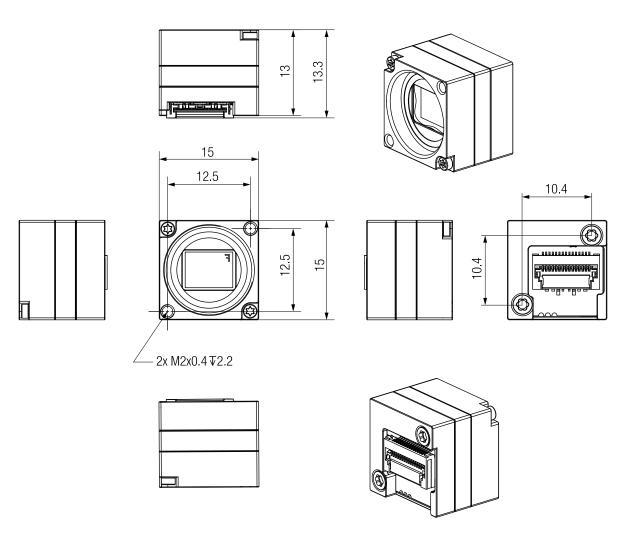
Dimensional drawing of MU196xR-ON with ADPT-MU-CX3-FL adapter
